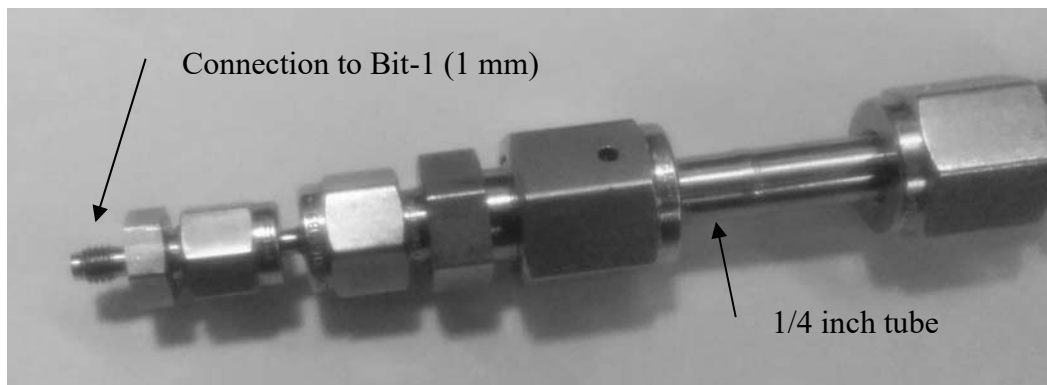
Propellant Tube Adapters between Propellant Line and Thruster Line
